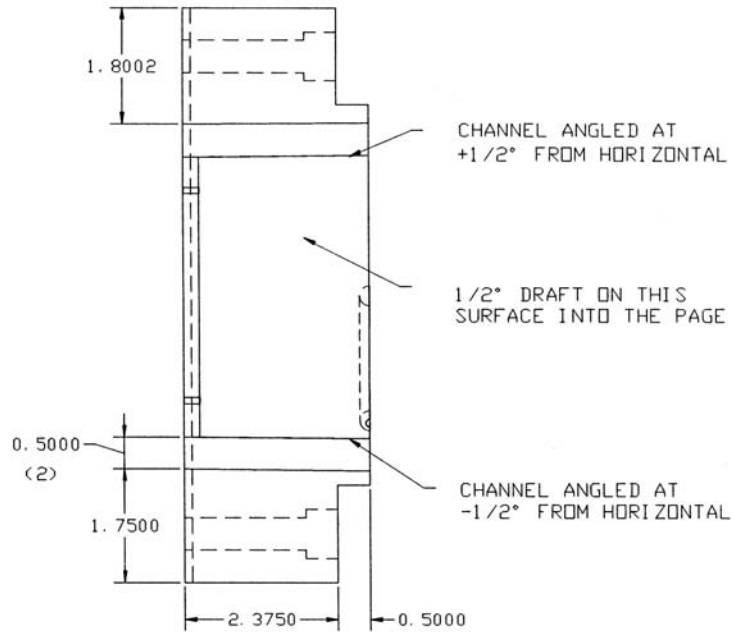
Front view of the cavity block. All dimensions are in inches.
